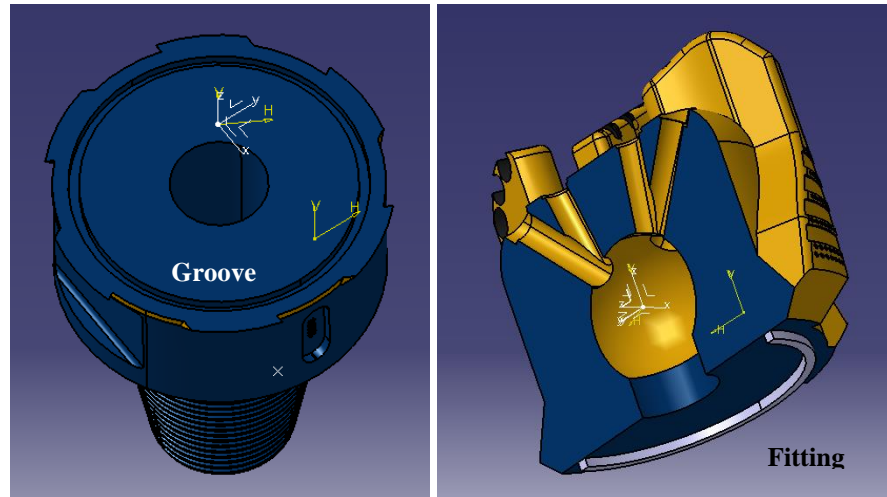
Representation of Groove and Fitting of the Sectioning Parts
